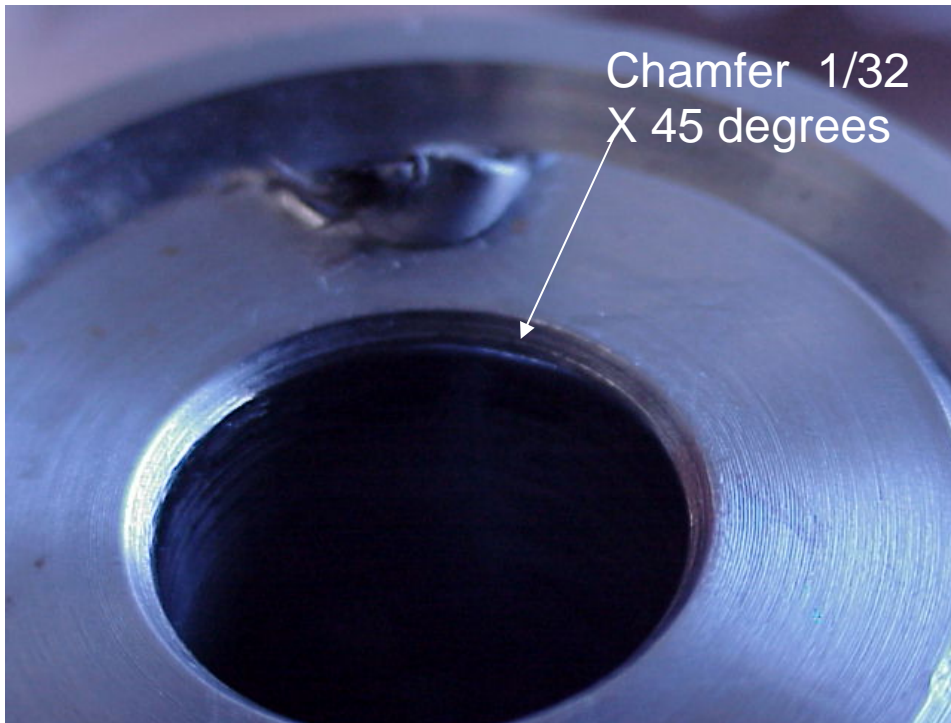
Spindle/Adapter Interface with 45° Chamfer
